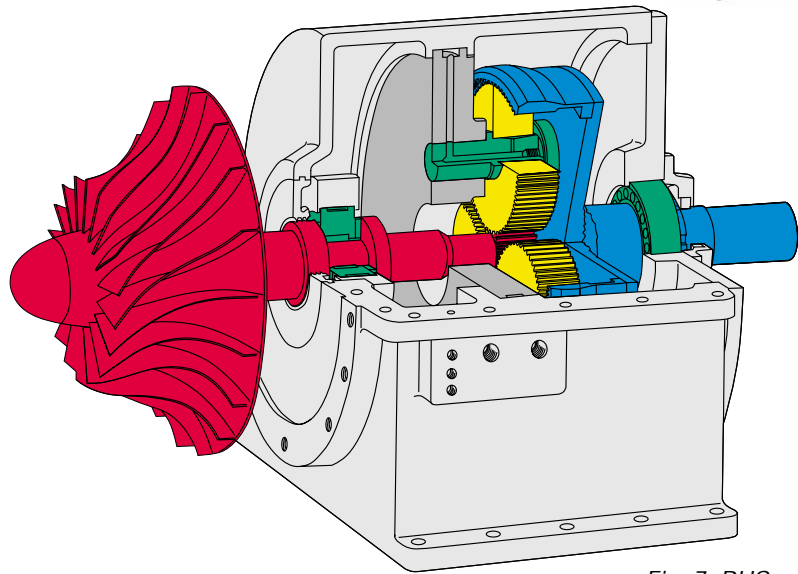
BHS Integral Epicyclic Gear Unit, Type RTG.
